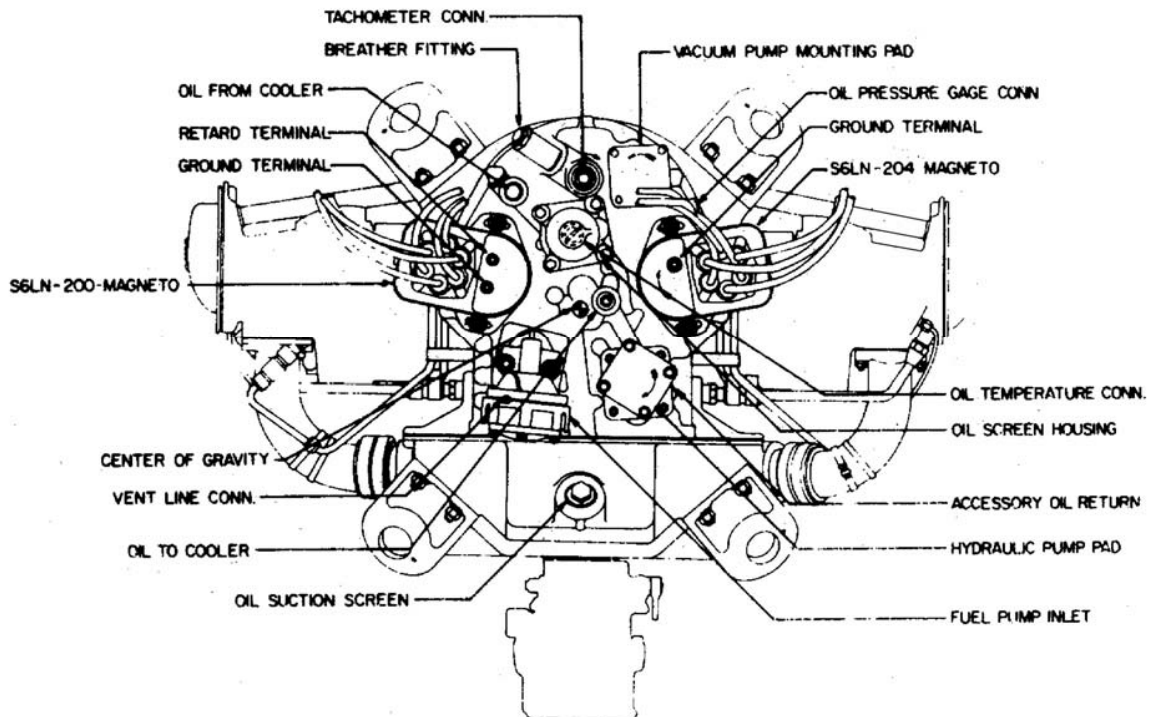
Installation Drawing – Rear View – IO-540-C, -D, -J, -N
